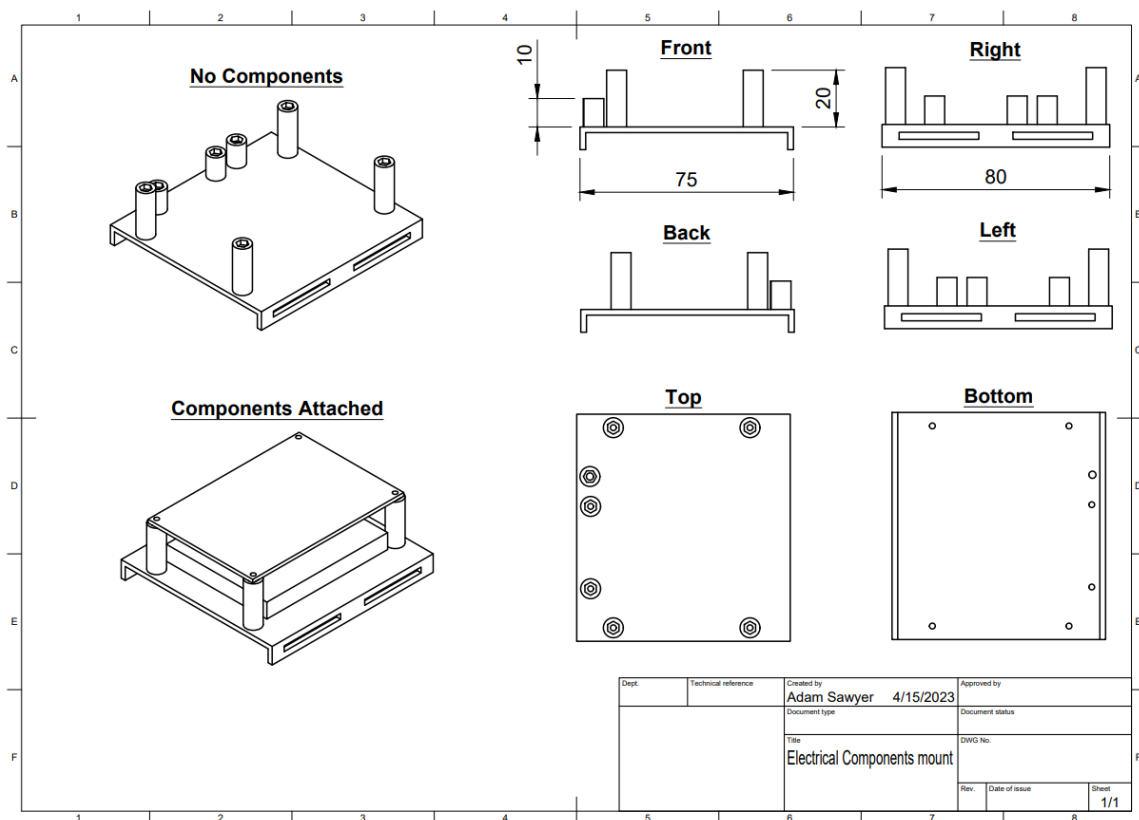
Technical Drawing of Electronic Housing Mount for Glove (dimensions in mm)
